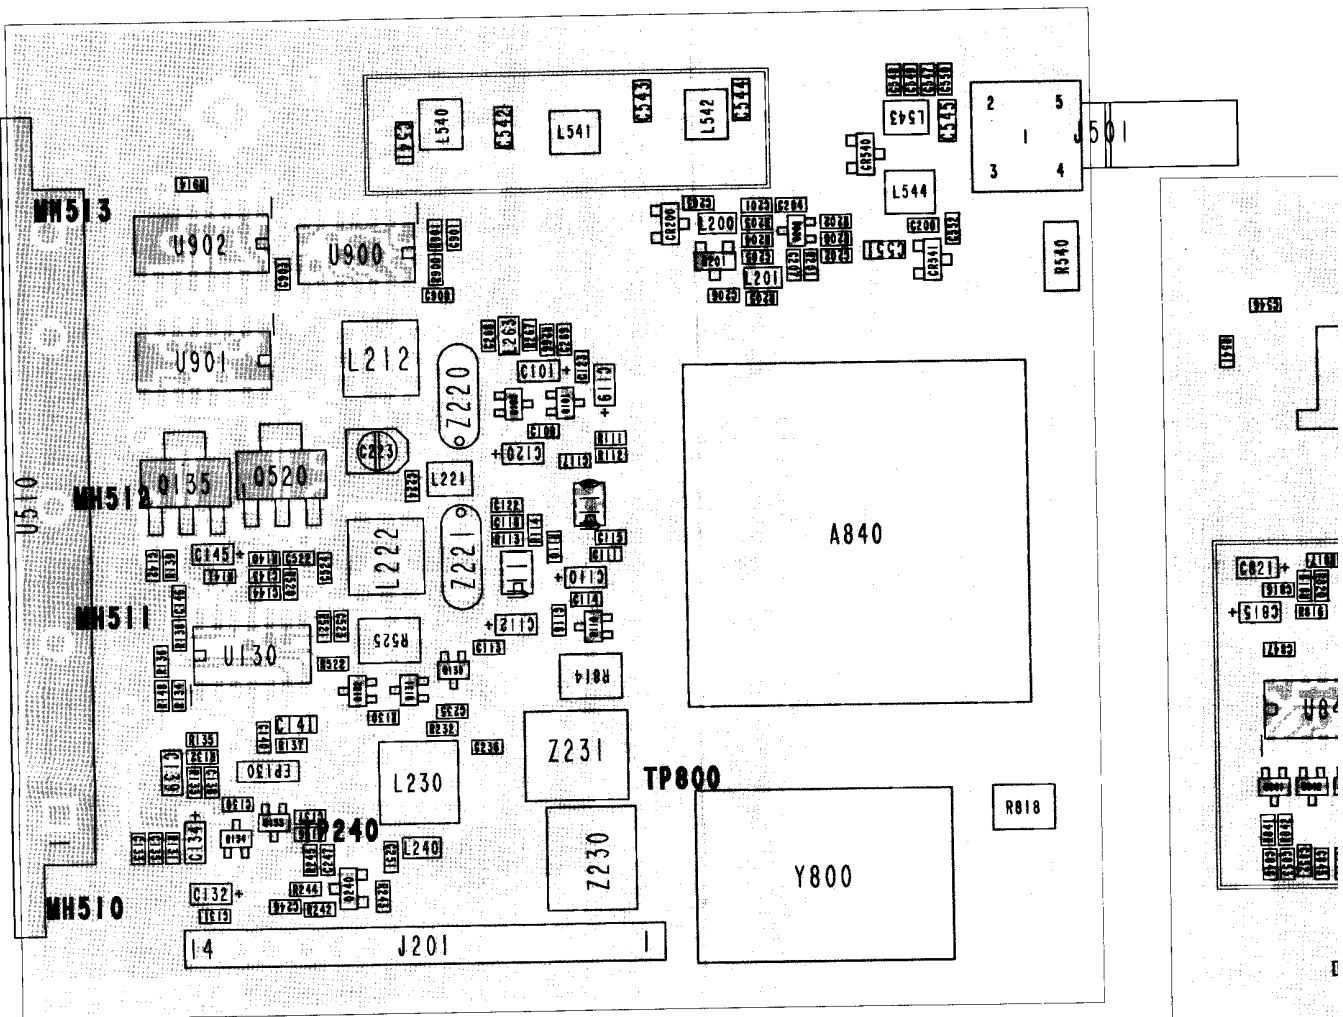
TRANSCEIVER COMPONENT LAYOUT (COMPONENT SIDE VIEW)
